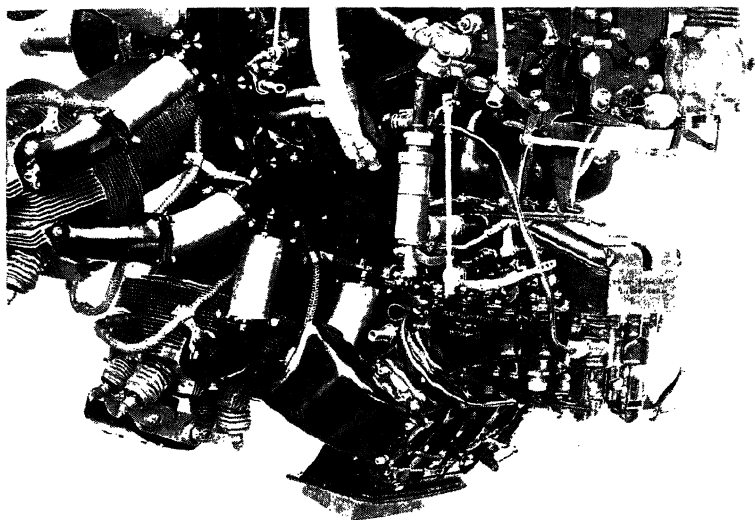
The carburettor and induction system of the Bristol "Mercury" and "Pegasus" engines, showing also the twin inlet and exhaust valve gear, shielded ignition cables, sparking plugs, etc.
